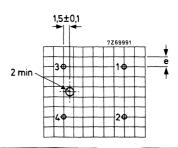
Hole pattern for mounting on a printedwiring board (component side). Hole diameter 1,3+0,1 mm. e=2,54 mm (0,1 in).
